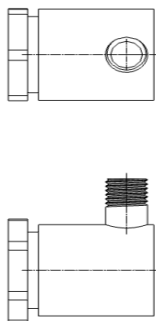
Input Section, Which Acts As An Intake For The Rhvt Side View And Top View
